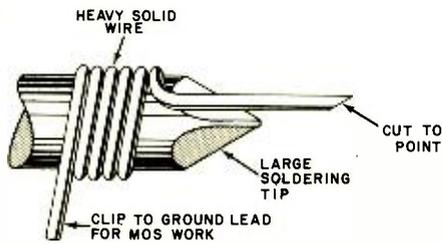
To prevent damage to MOS devices during soldering, prepare this special tip for soldering iron.
